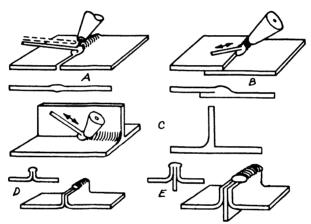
Sheet aluminum welds: A. Butt weld, note the dipping action of the filler rod; B. Lap weld, note the angle of the torch and the filler rod pushing the puddle back, C. Tee weld, D. Two piece deep flange weld, E. Three piece deep flange weld
